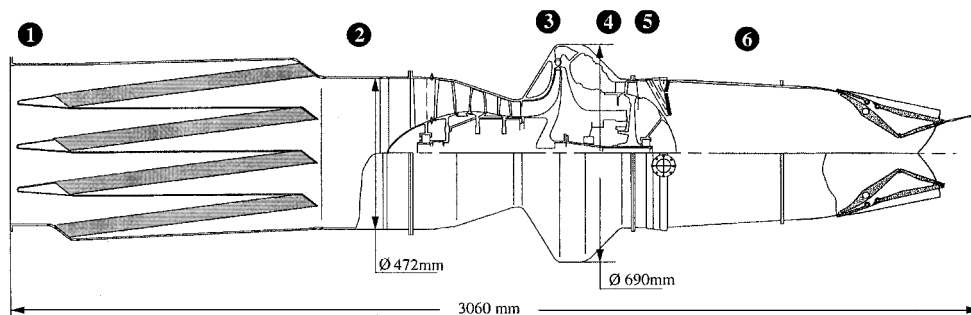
Dimensional scheme of the 7-ton thrust DCTJ.
